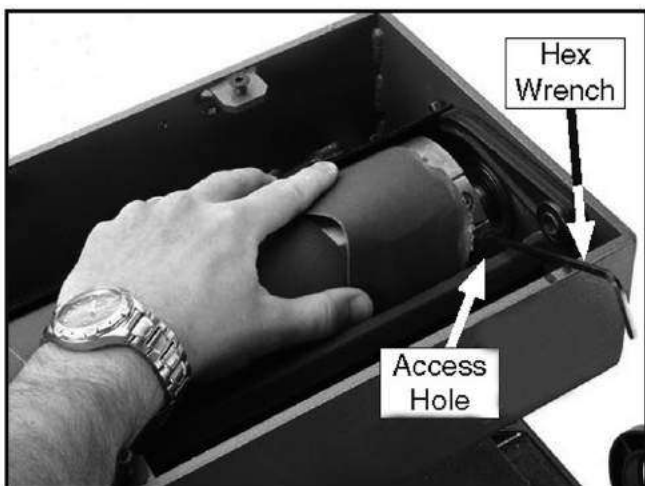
Hex wrench inserted into access hole on right tension wheel.
